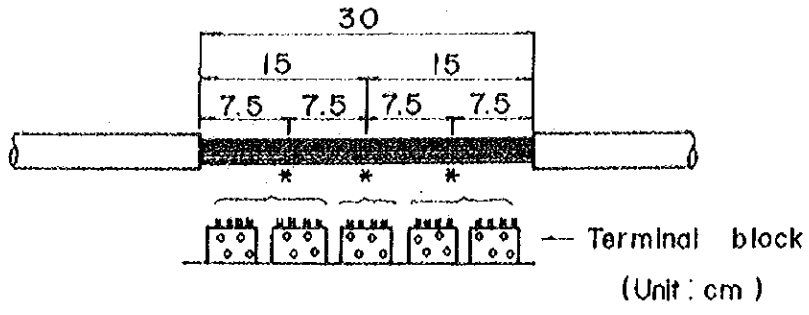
Cutting the Cable Conductor
